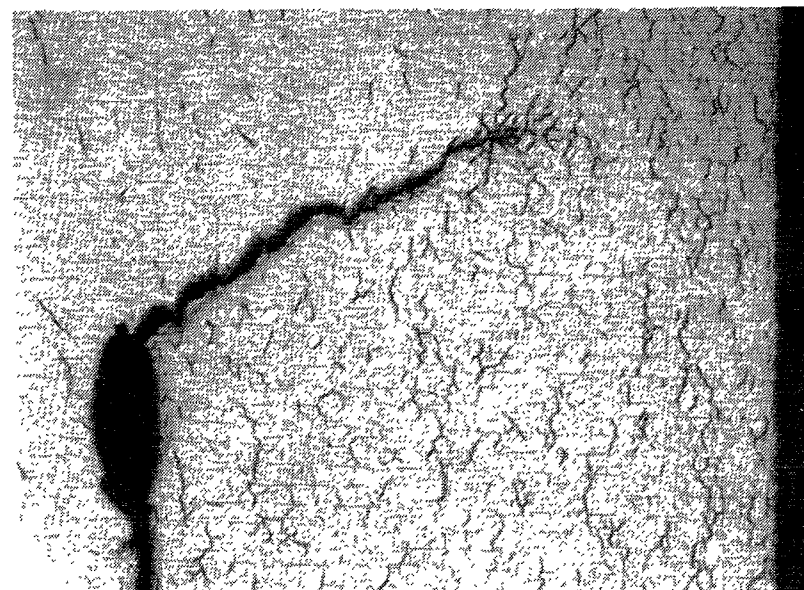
A Typical Crack through the Weld Heat-Affected-Zone of a Defective Fuel Bundle
